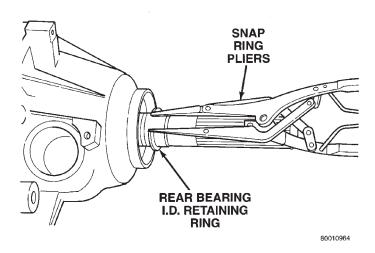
Output Shaft Rear Bearing Retaining Ring
